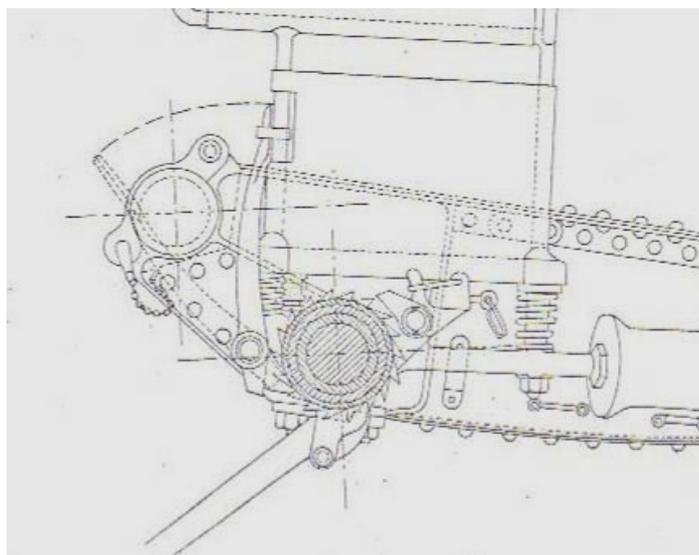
drawing showing the braking mechanism<sup>6</sup>
